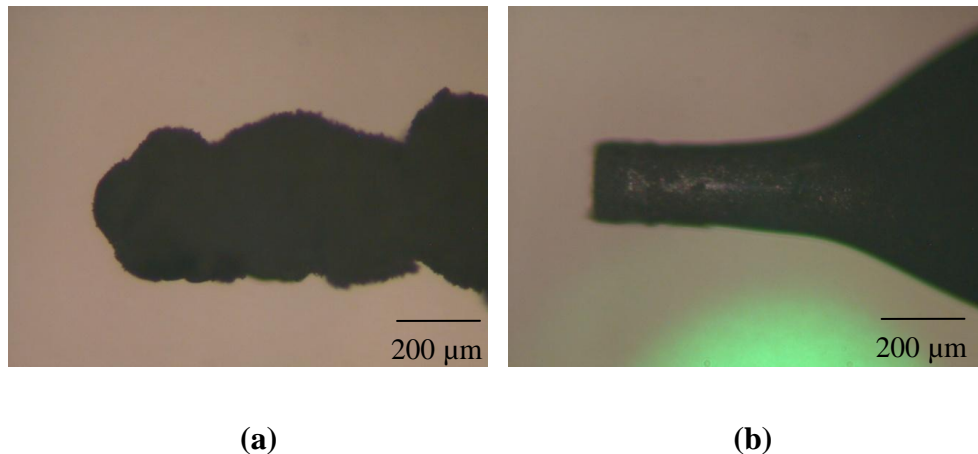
Images of in-house made abrasive bonded tools before (a) and after machining (b)
